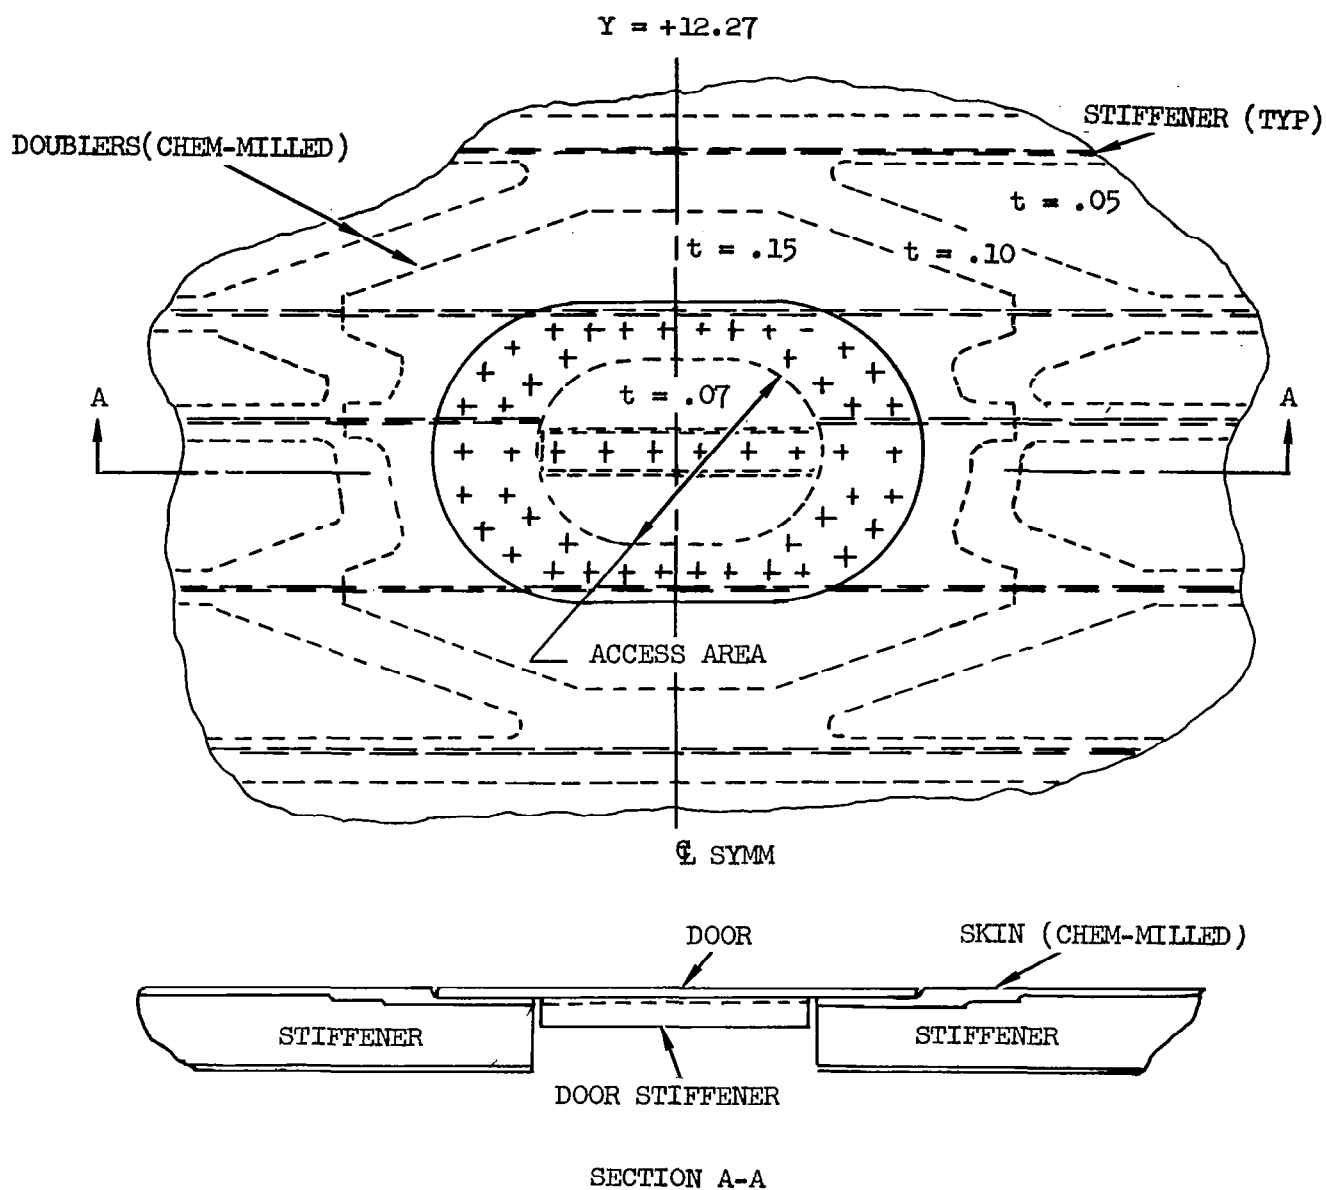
General Internal Arrangement of Fusion Welded Skin Test
